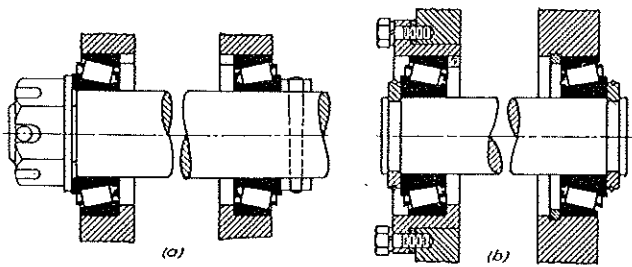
Roller bearing mountings. Courtesy Timken Roller Bearing Co.
